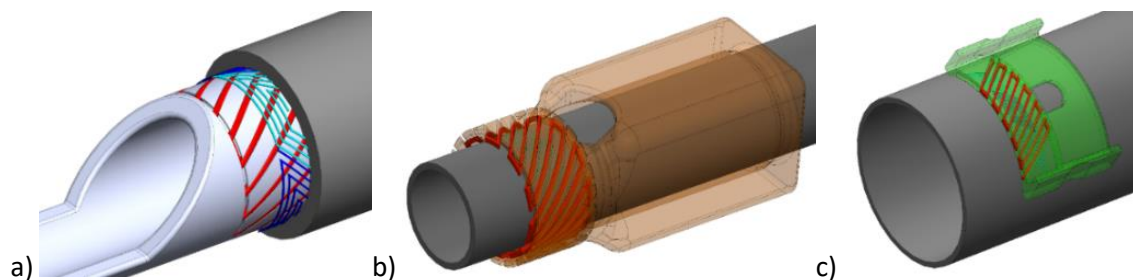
Chassis examples; a) inner surface inspection probe; b) outer surface inspection probe; c) outer surface section inspection probe.
